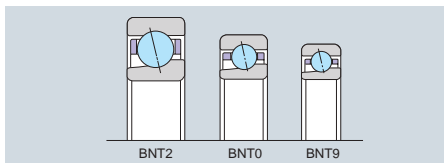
High-speed angular contact ball bearings for grinding machines/motors
